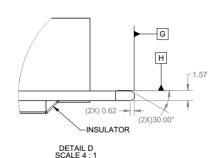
Small Form Factor Keep Out Zone - Side View - Detail D
